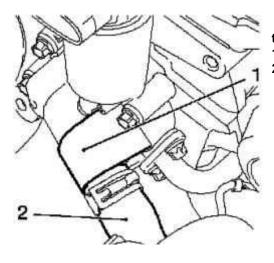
Disabling the cooling of the exhaust gas recirculation valve: 1 - exhaust gas recirculation valve, 2 - hose coolant
